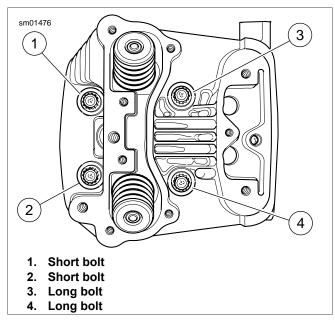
Front Cylinder Headbolt Torque Sequence
